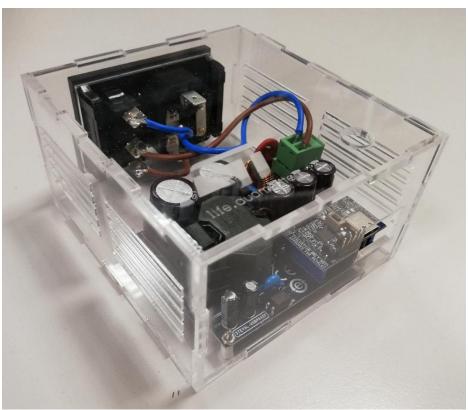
Mounting the STEVAL-USBPD45C board – nuts
